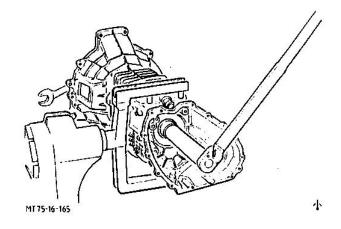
Tighten transmission mainshaft nut using Special Tool 16-051 and torque wrench.
